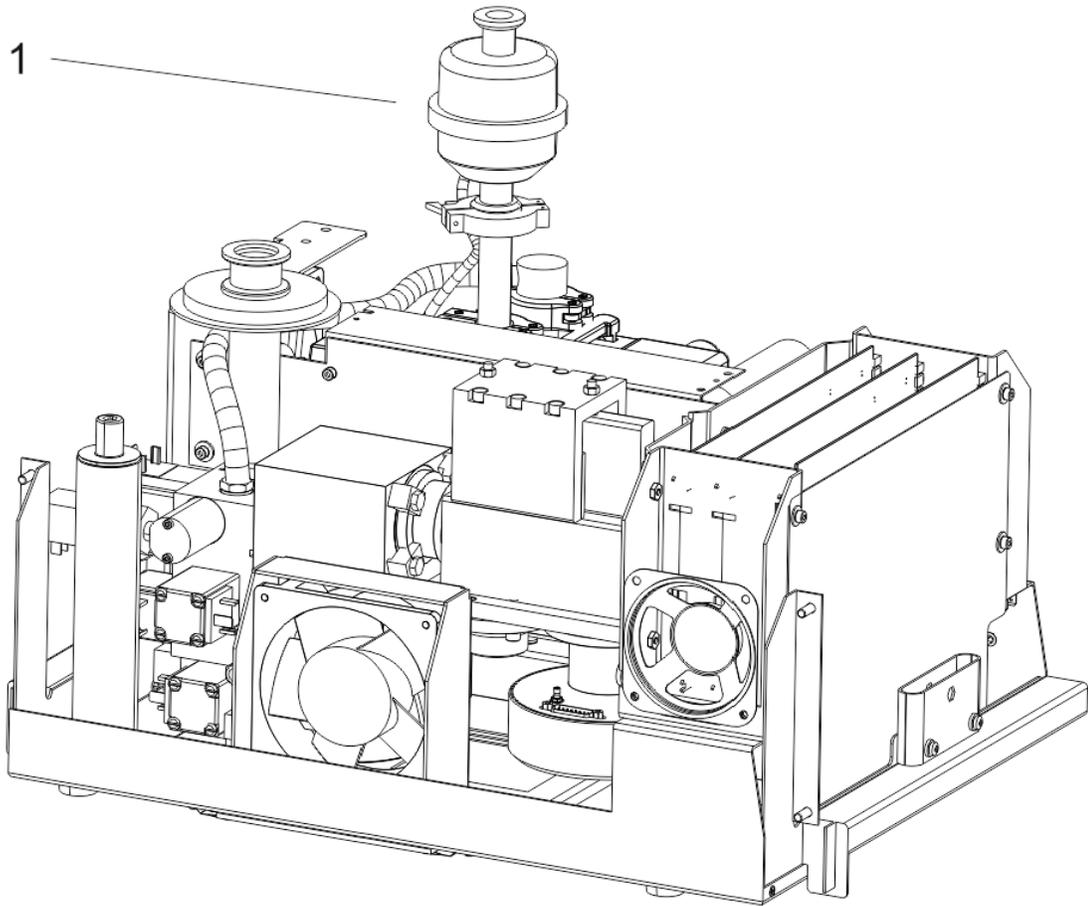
TITANTEST™ P-Series specific, Chassis Front View
